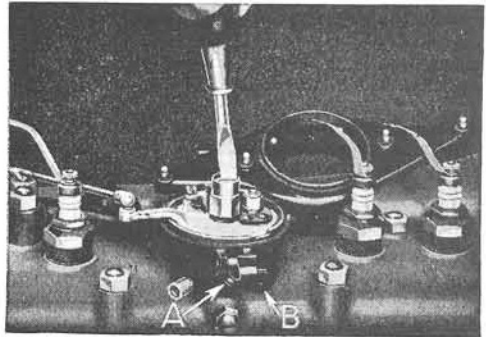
Loosening cam locking screw so cam can be turned. The distributor cover, rotor and distributor body are removed.
